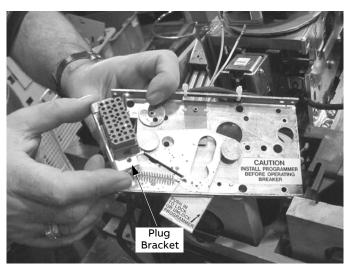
Reinstalling the large plug on the trip unit mounting plate.
